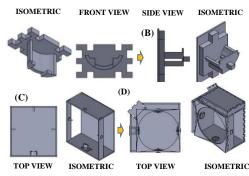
SCHEMATICS SHOWING (A) PROTOTYPE GEAR HOLDER AND ORANGE ARROW INDICATING (B) NEW FINALIZED MOTOR HOLDER. SCHEMATIC OF (C) PROTOTYPE EXTERNAL SUPPORT SYSTEM WITH ORANGE ARROW INDICATING (D) NEW EXTERNAL SUPPORT SYSTEM
